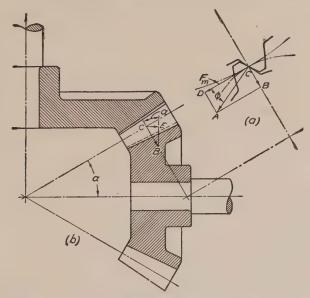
Axial Thrust of Straight-Tooth Bevel Gears.
